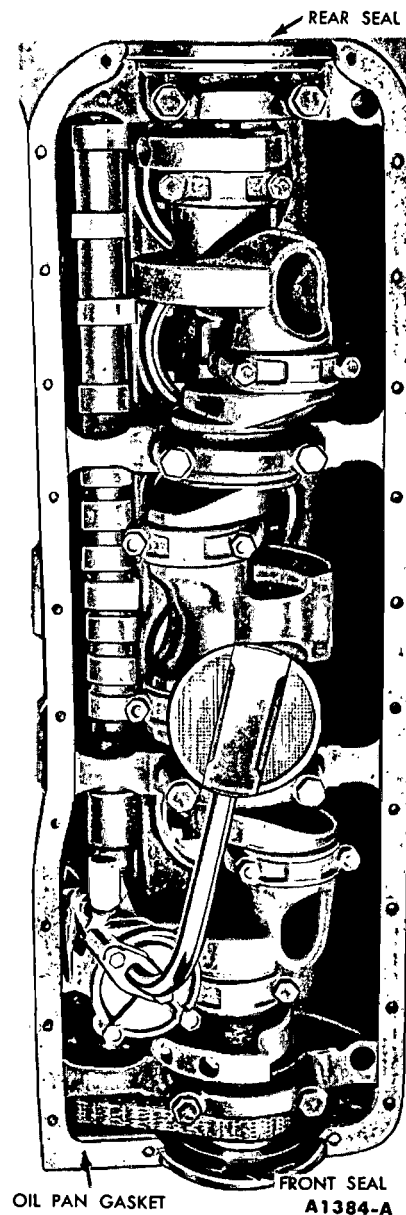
170 Six Oil Pan Gaskets and Seals Installed
